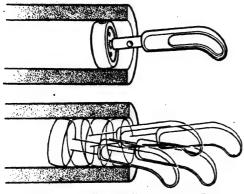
The "Te-Bo" Spherical Ball Gauge
